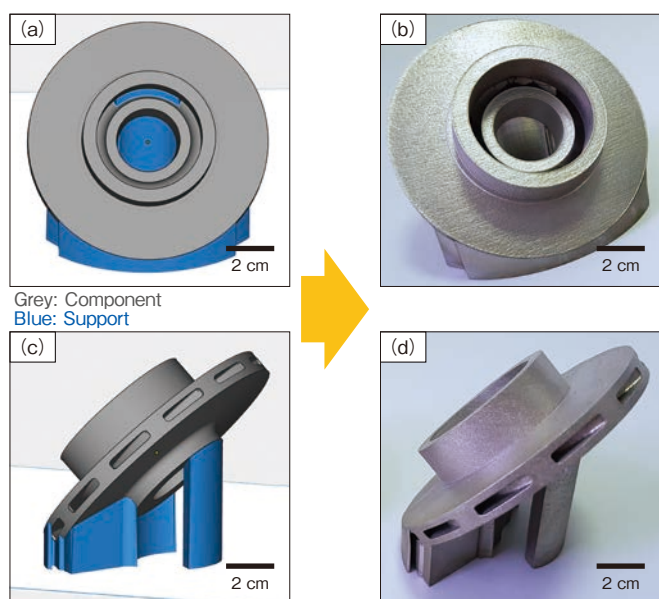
Modified design with the support structures and the SLM-built impeller with HM[®] Alloy718. Images showing (a) model front view, (b) SLM-built part front view, (c) model side view, and (d) SLM-built part side view
